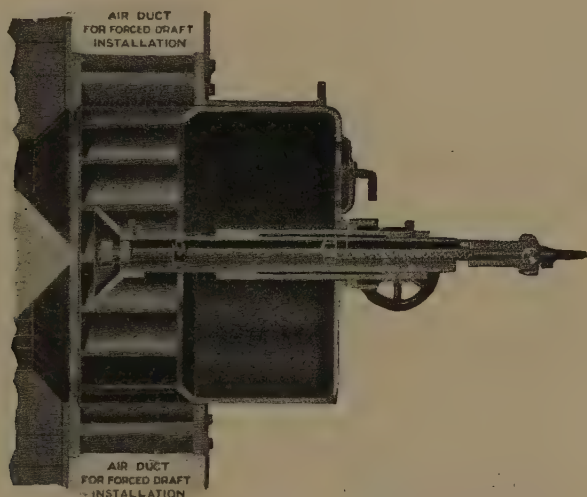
Dahl Mechanical Atomizing Burner, consisting of tip of special design mounted on end of burner pipe, which extends into furnace front through an adjusting pipe. On the end of adjusting pipe is a cast iron deflector which can be adjusted by moving in or out to position where flame will receive proper amount of air for perfect combustion. Operator can regulate supply of air to burner by adjusting area of air inlet. This is accomplished by means of a rack and pinion attachment fitted with hand wheel, which operates a movable part of the furnace front to open or close the air inlet.
